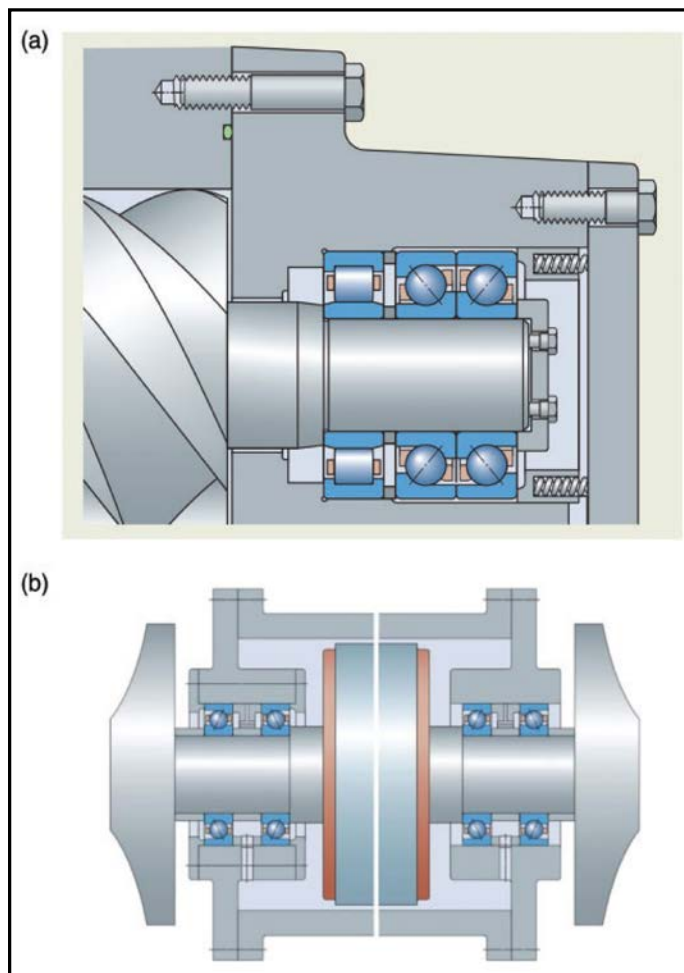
(a) Typical bearing arrangement for compressors; (b) two-stage compressor with back-to-back impellers positioned at opposite ends of the motor containing a bearing arrangement of two back-to-back pairs of high-speed angular contact ball bearings.
